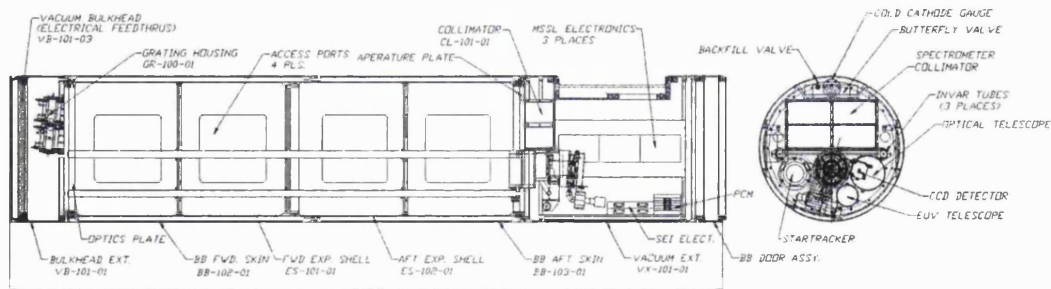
An engineering drawing showing the layout of the J-PEX flight payload.
